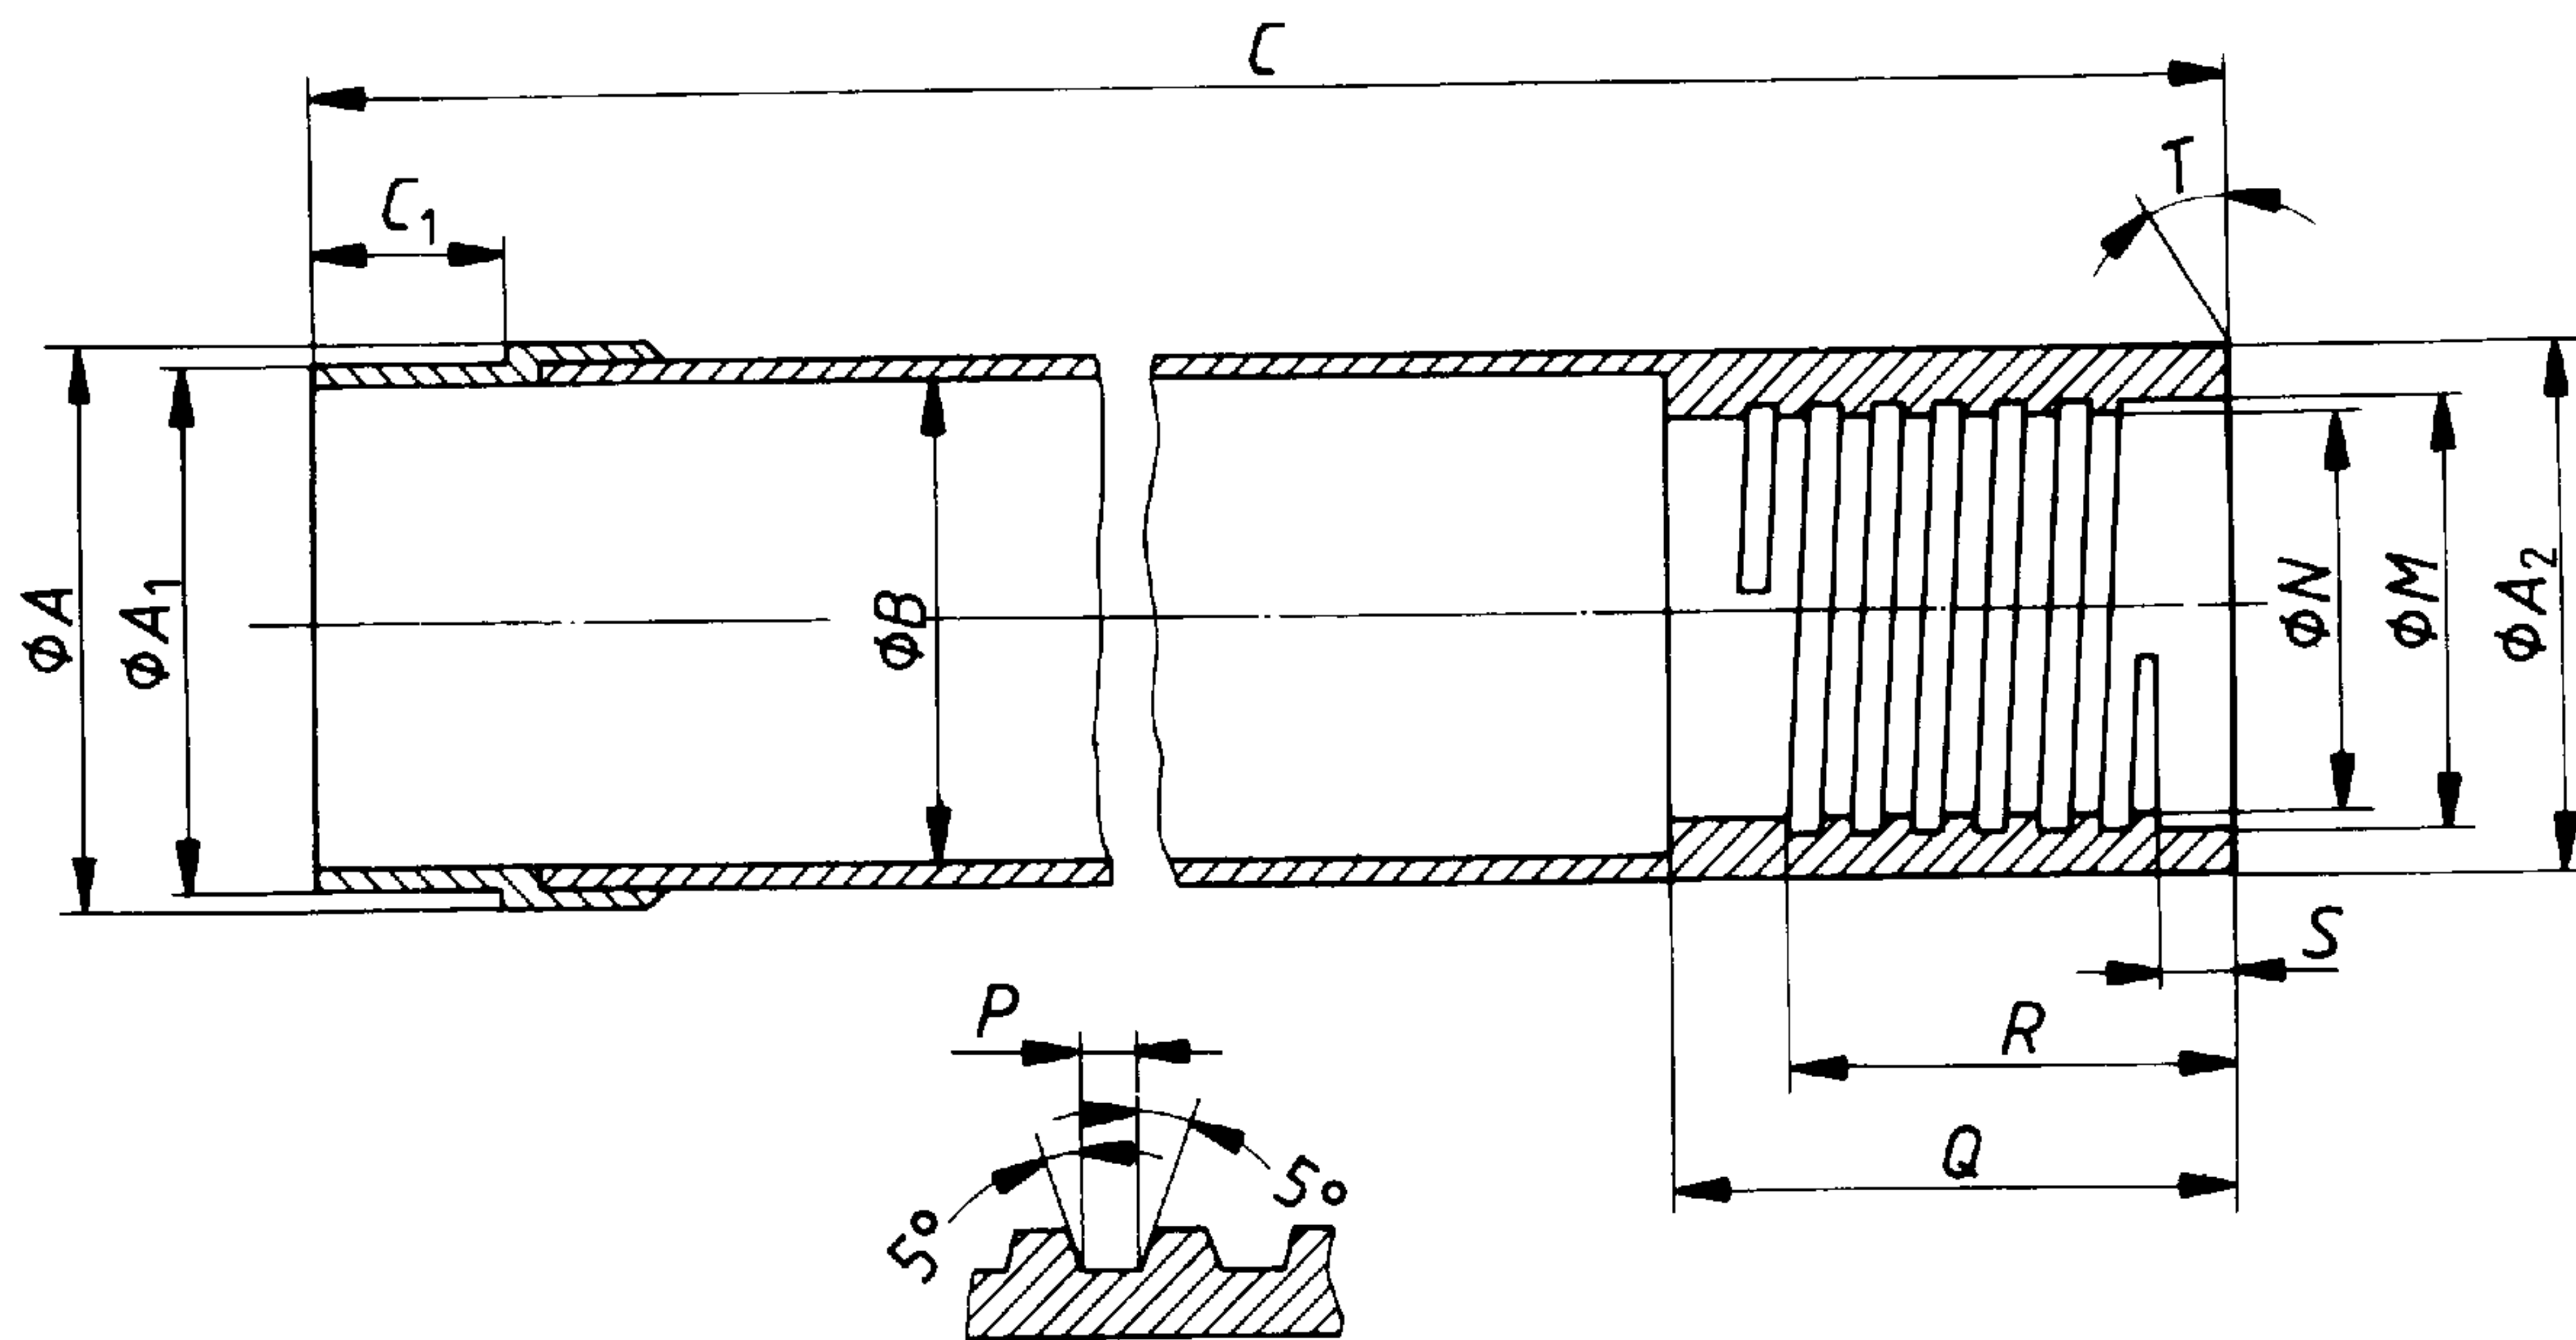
"WF" design double-tube core barrel — Inner tube (see table 26)
